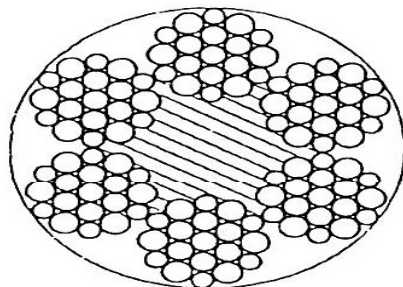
6 × 19 SUSPENSION ROPE, WARRINGTON-TYPE STRAND
